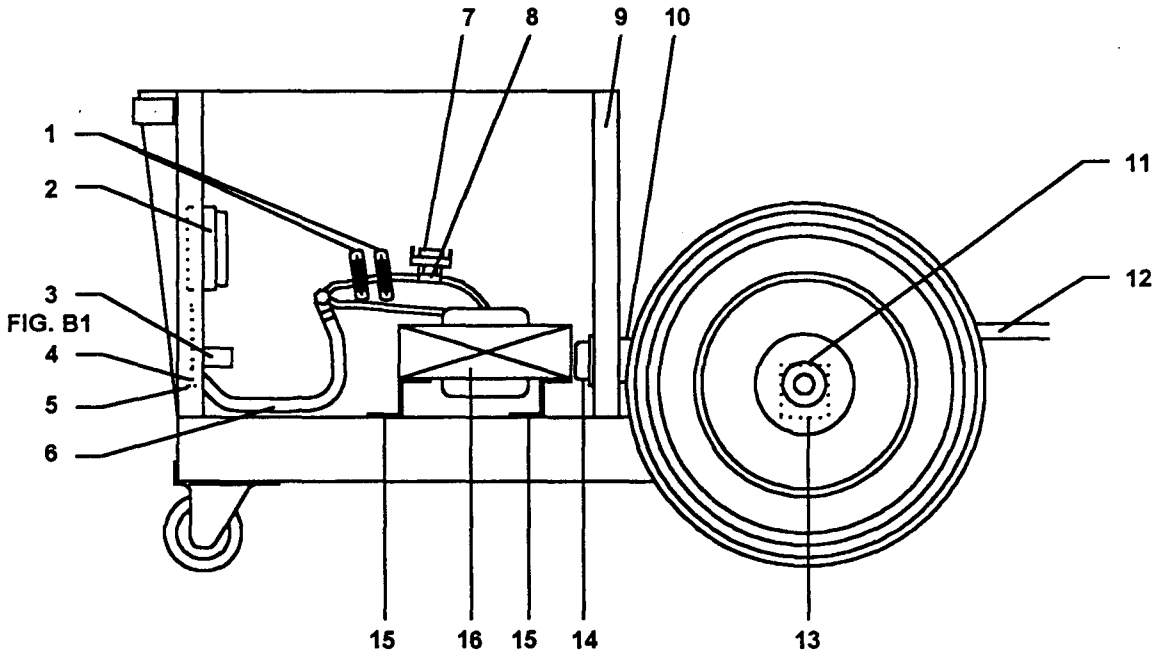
FIGURE B - RIGHT SIDE VIEW & INTERNAL COMPONENTS
